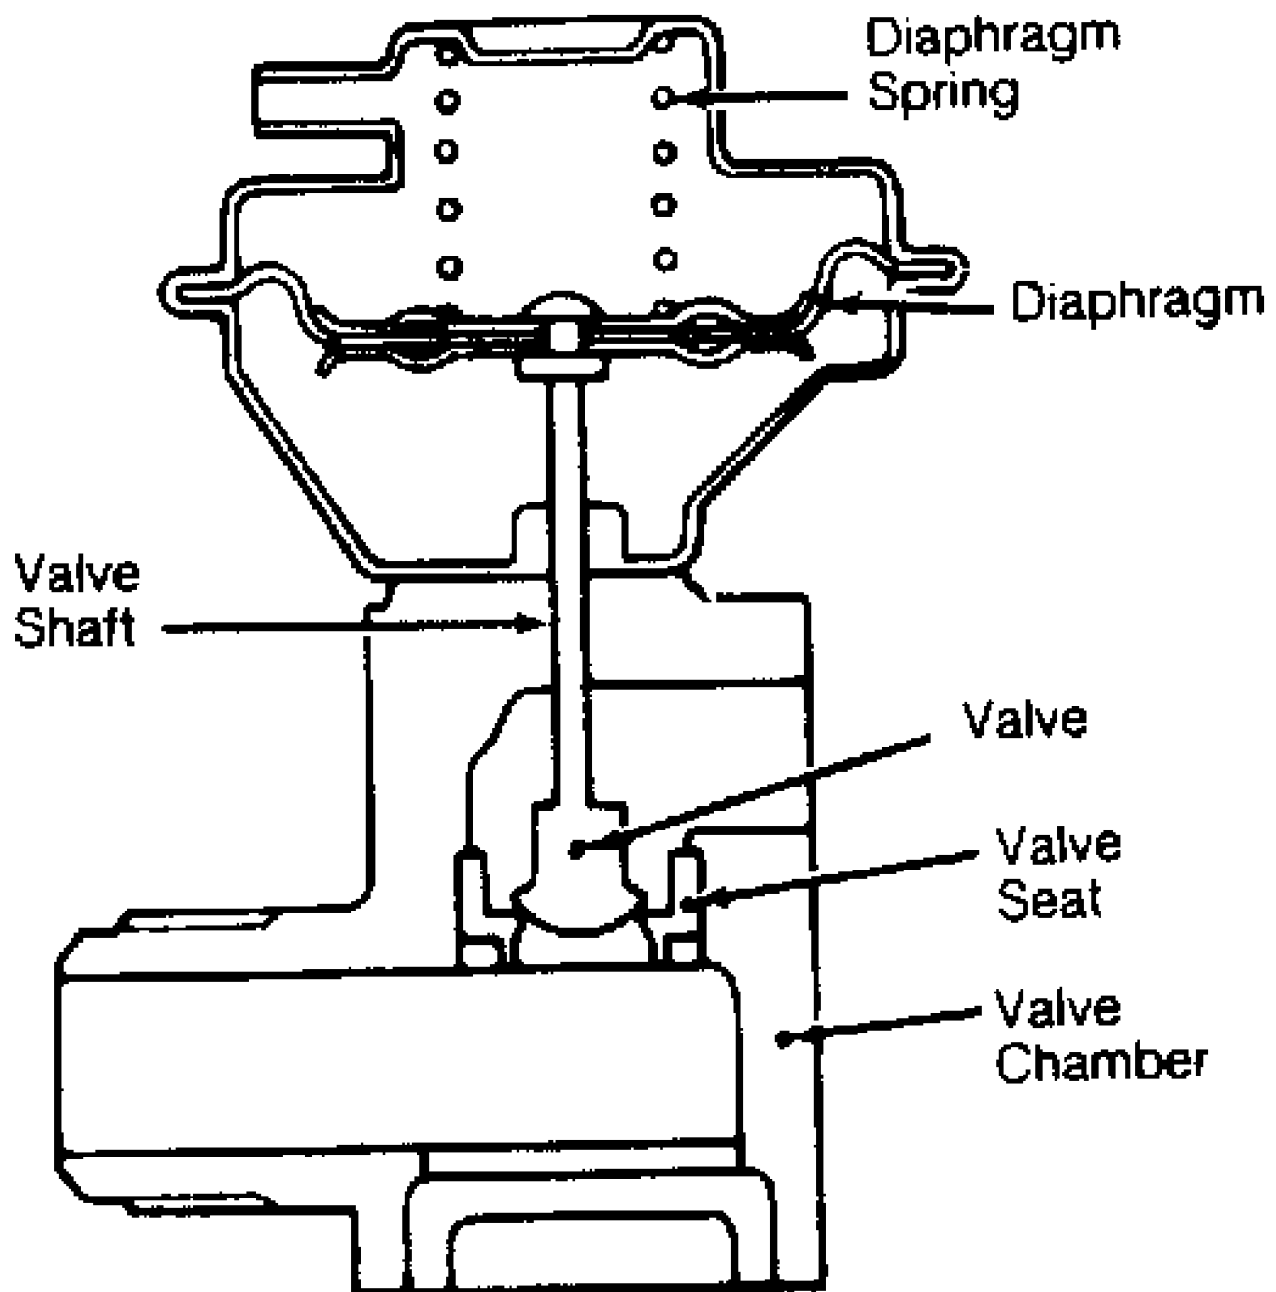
Cross-Sectional View Of Typical EGR Valve
